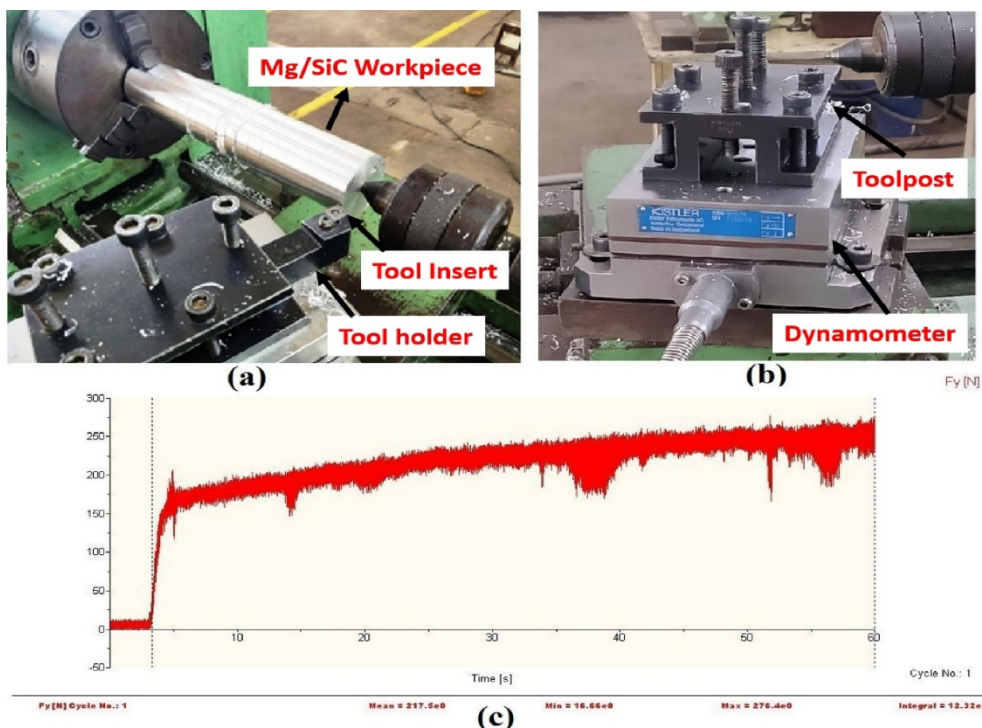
(a) Machining setup of Mg/SiC<sub>p</sub>, (b) Lathe tool dynamometer (c) Cutting force from data acquisition software
